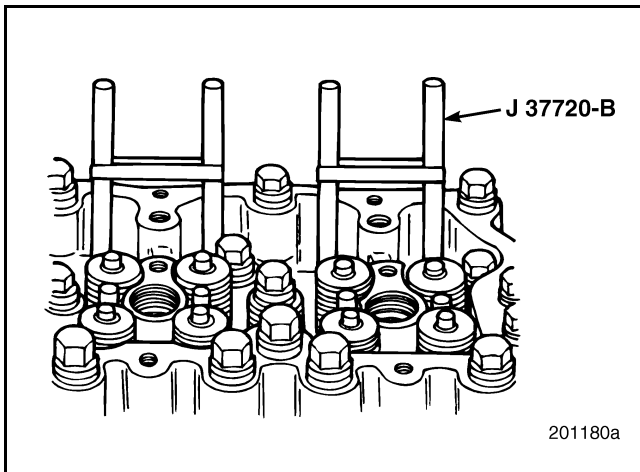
Valve Lifter (Tappet) Holder Tool J 37720-C
